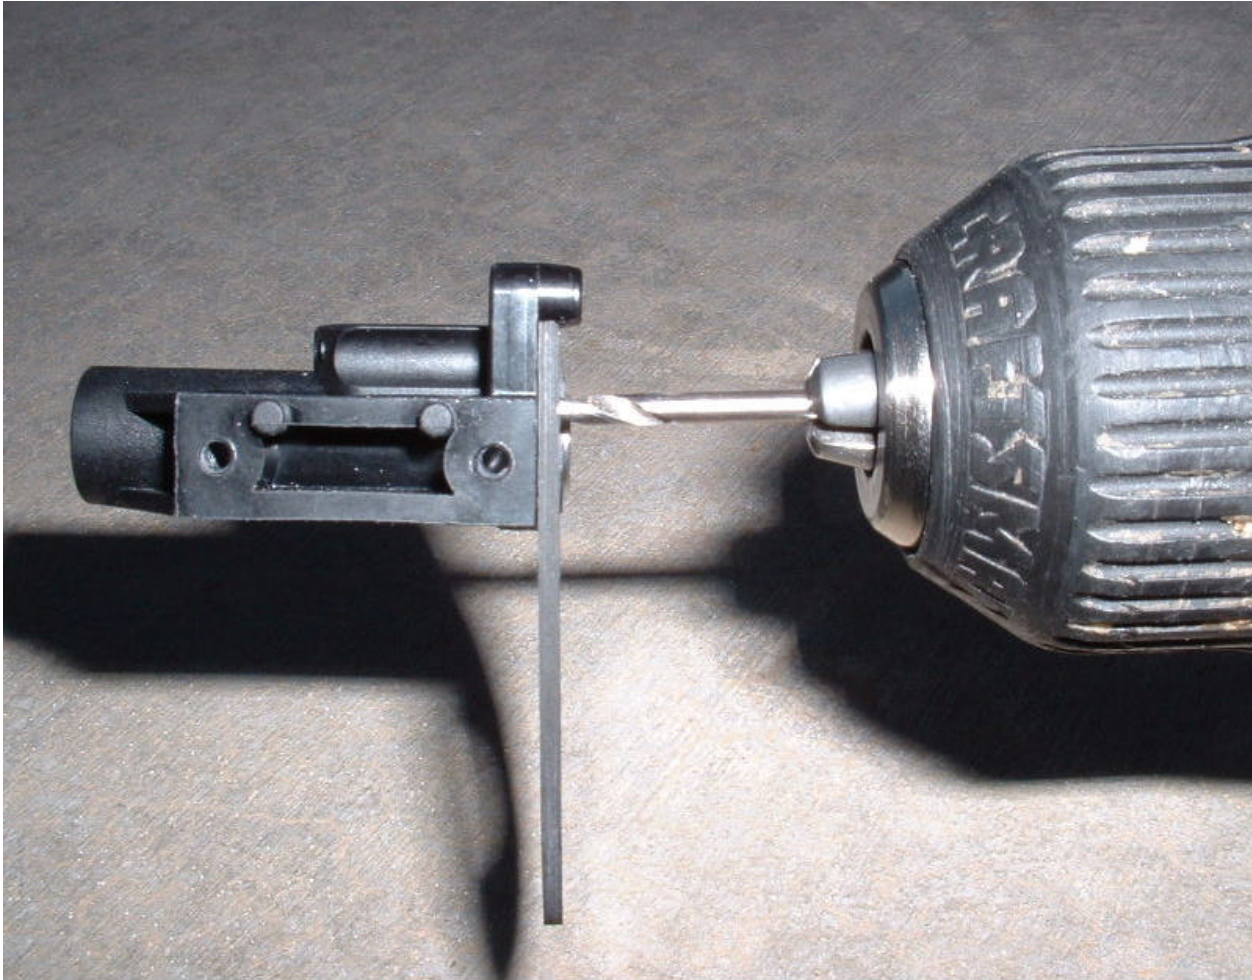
Use the motor plate holes as a guide when drilling the two new motor plate holes.
